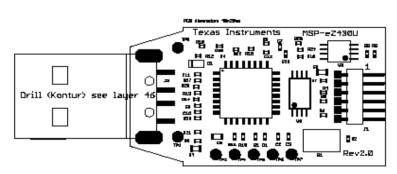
eZ430-RF, USB Debugger, PCB Components Layout
